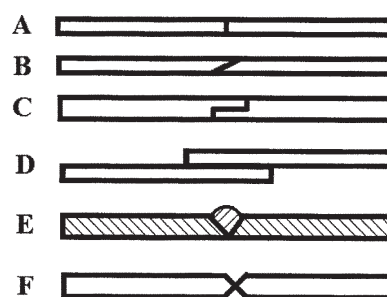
The types of the joints used in welding-brazing operation: Type A – head to head, Type B – oblique head to head, Type C - with adjustment and overlapping, Type D – with overlapping, Type E – with chamfering, Type F – double chamfering.
